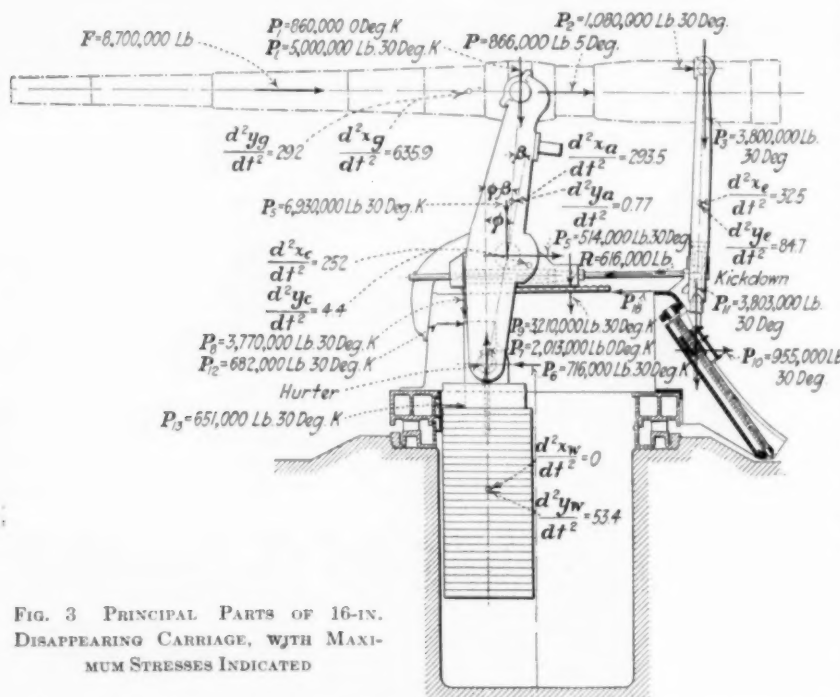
PRINCIPAL PARTS OF 16-IN. DISAPPEARING CARRIAGE, WITH MAXIMUM STRESSES INDICATED
